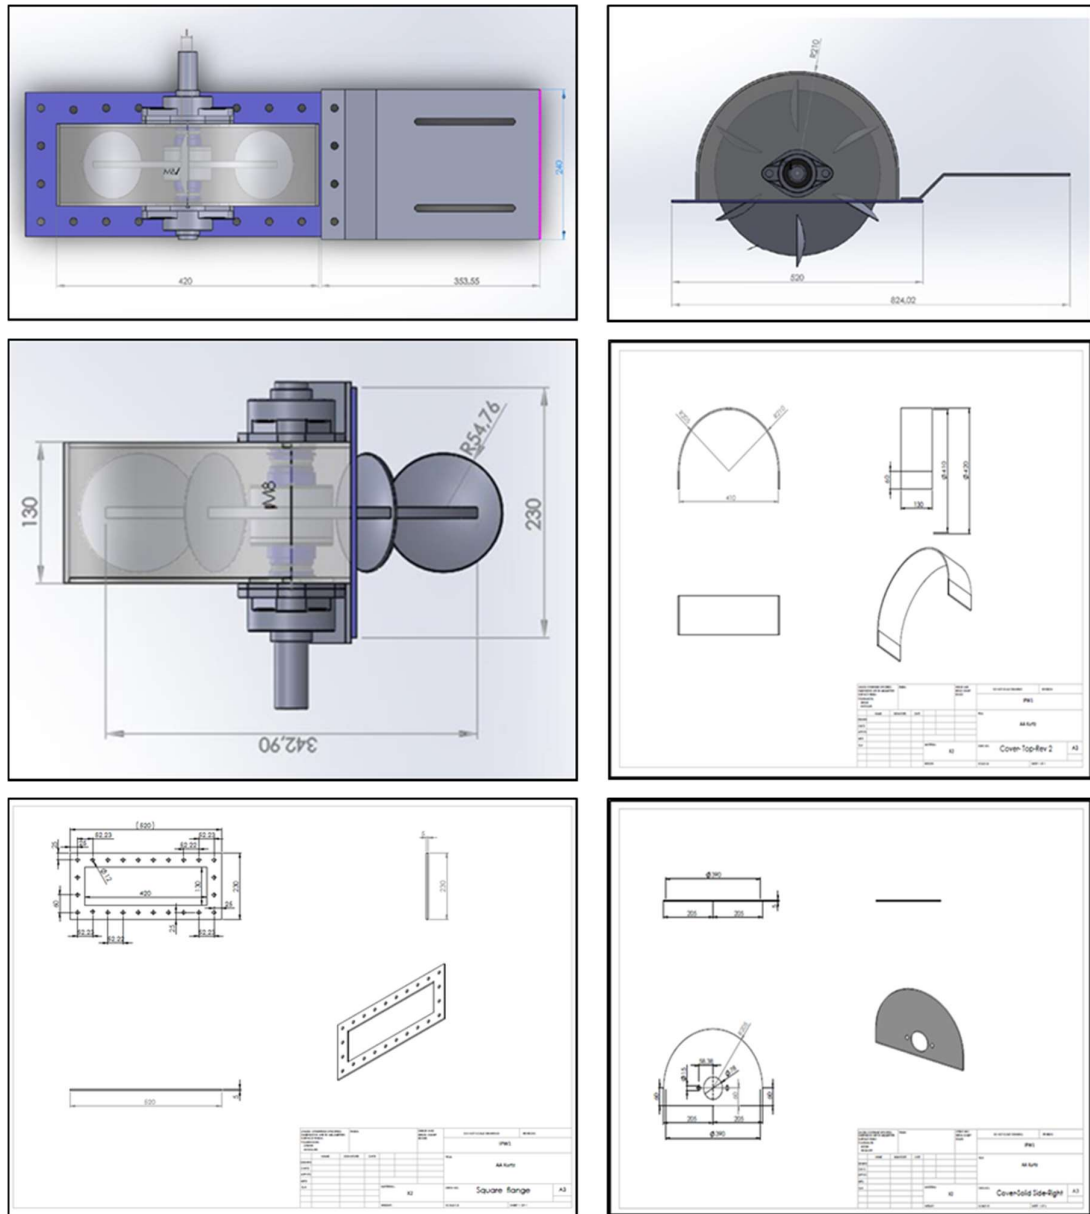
Detail design drawings part 1 of the IPW2 design
